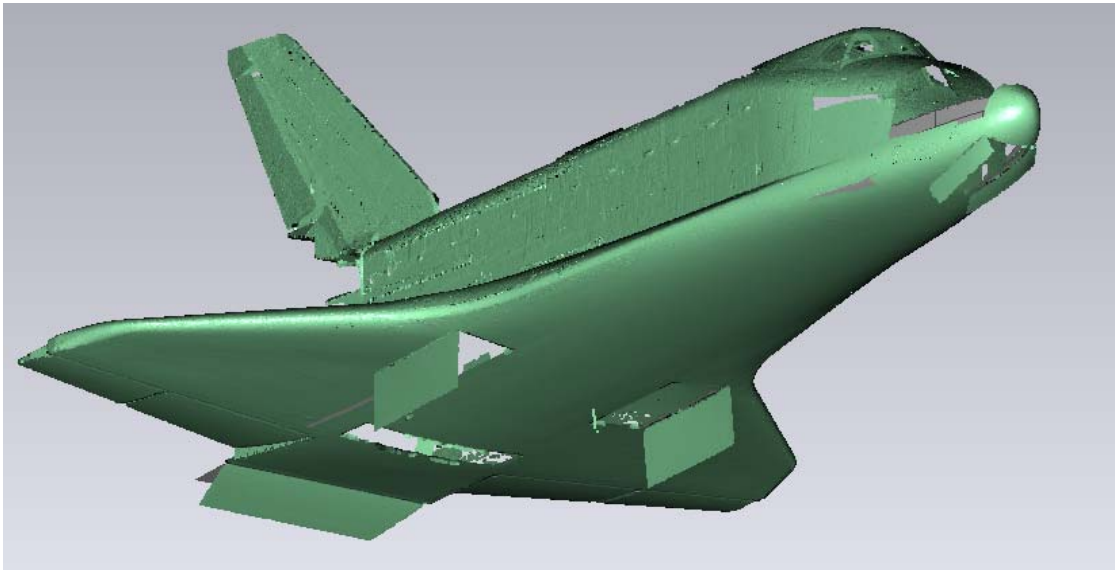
Digital Outer Mold Line surface isometric view of *Endeavor* with gear doors open.
